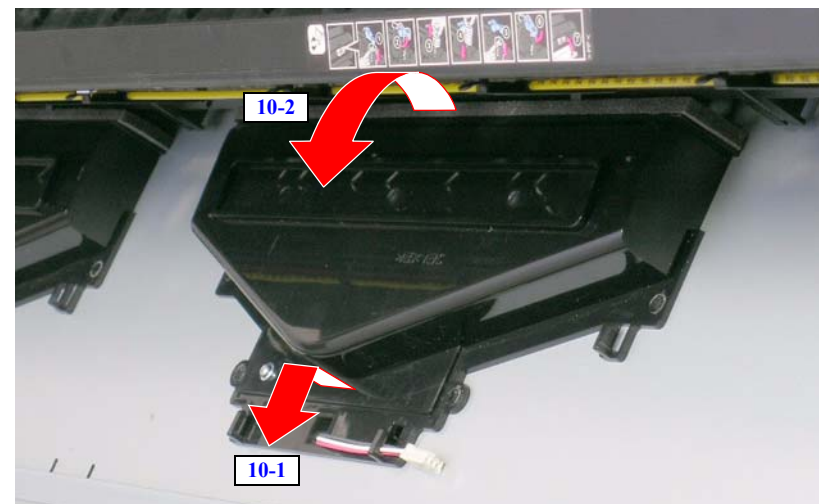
Removing the Left and Center VACUUM FAN Assies
